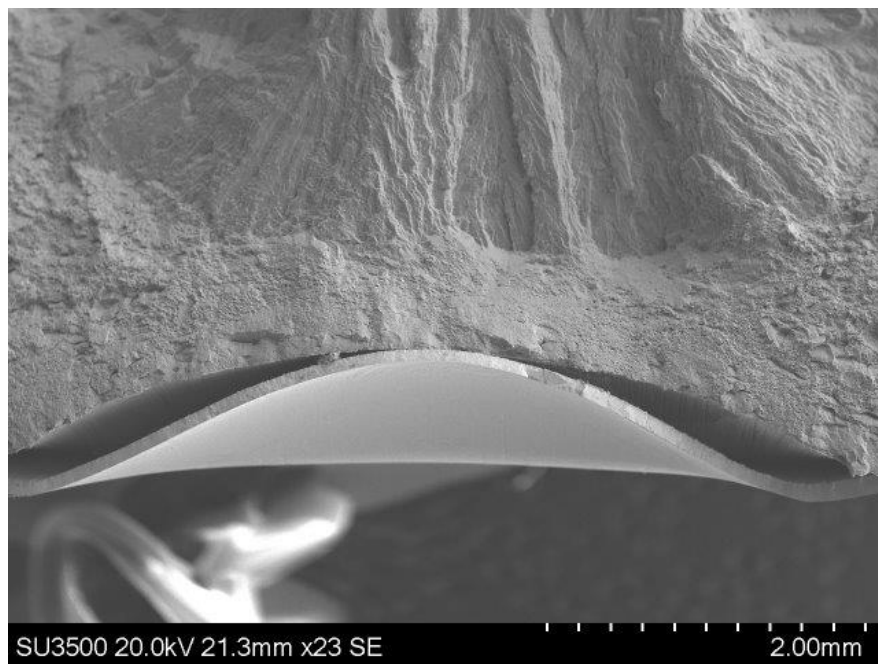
Detail view location M near the impact site on fracture surface of specimen H16.
